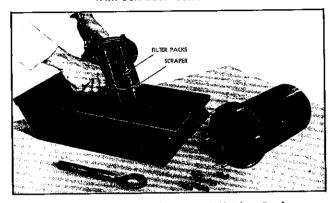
Cleaning Lubricating Oil Filter Packs with Scraper (Operation 1).
